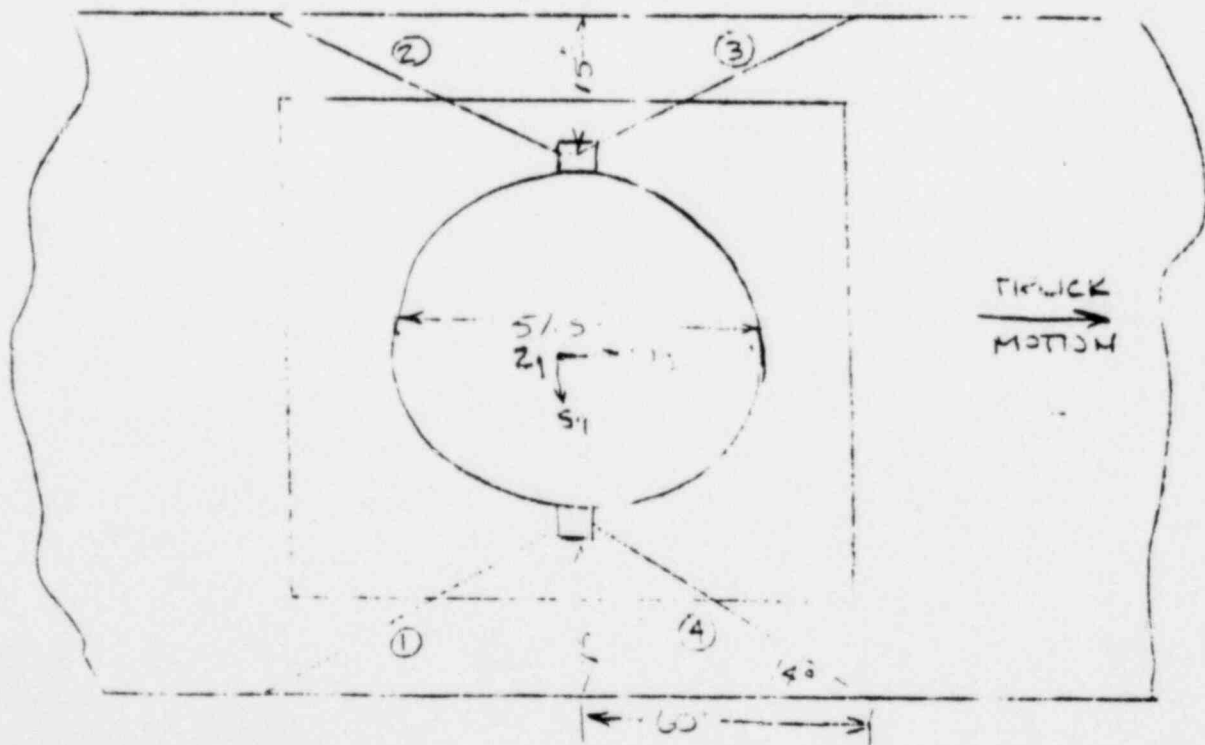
PLAN VIEW PACKAGE ON TRUCK BED
